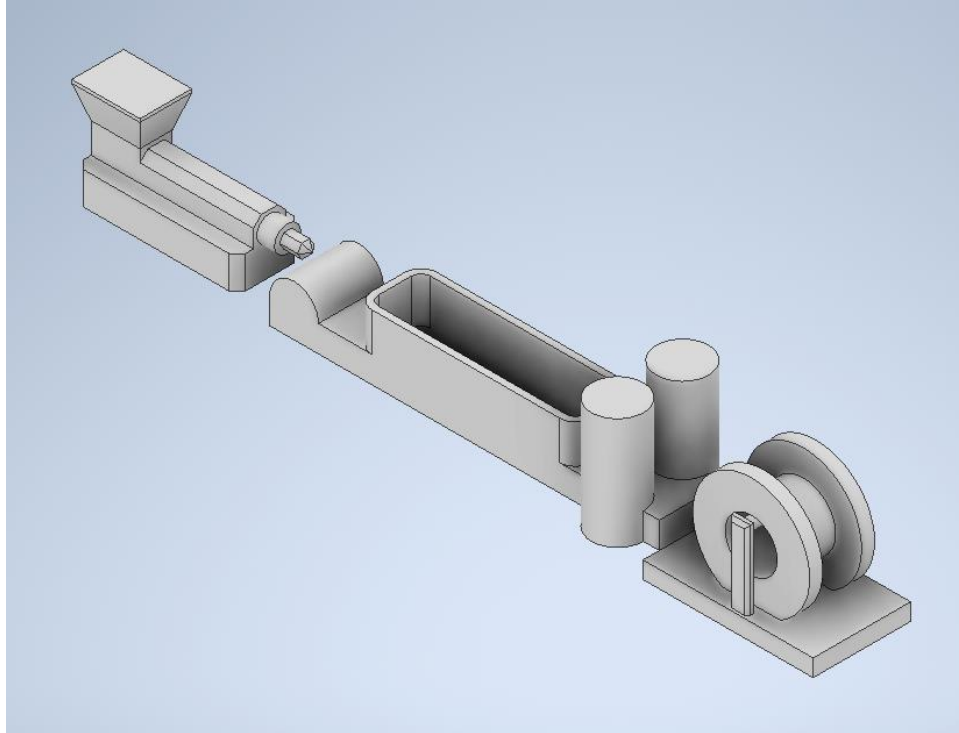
Mechanical Sketch - Overall System rendering. Isometric View
